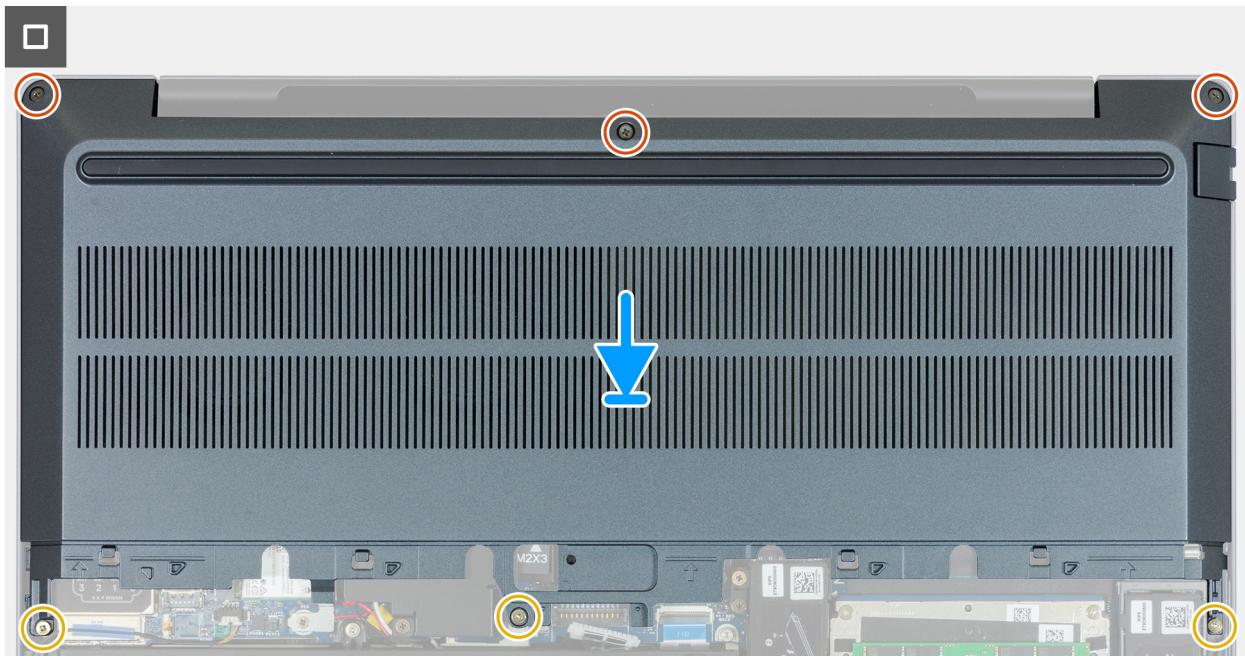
Aligning the screw holes on base cover with screw holes on palm-rest and keyboard assembly and replacing the screws
